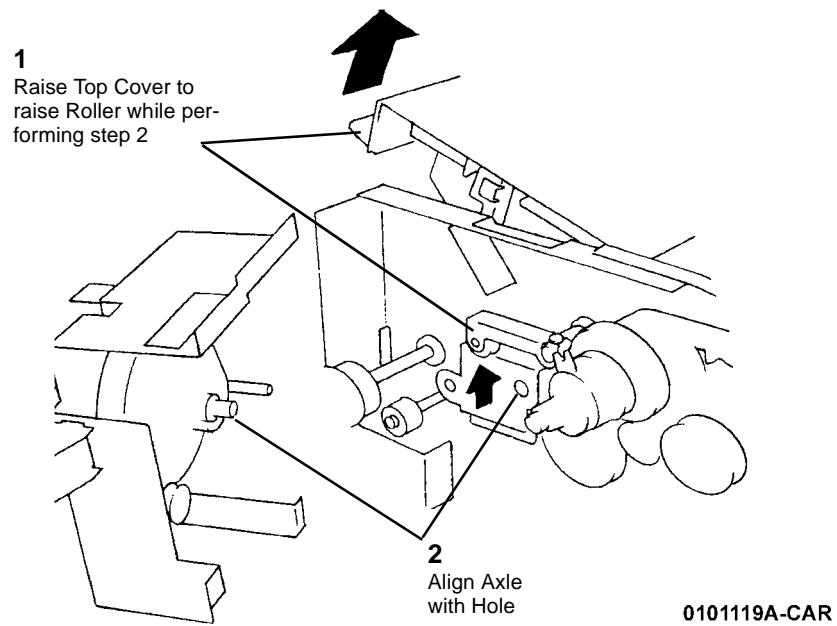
Inserting Axle of Cam Bracket Assembly into Hole
